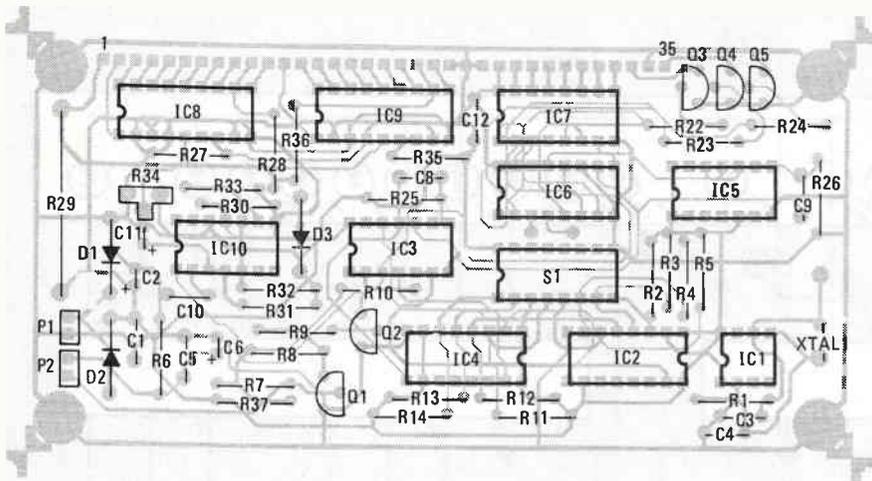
STUFF THE MAIN BOARD as shown here, and, after checking both boards for errors, connect them together with 35 pieces of short bare wire. The solder sides of the board should face each other.
